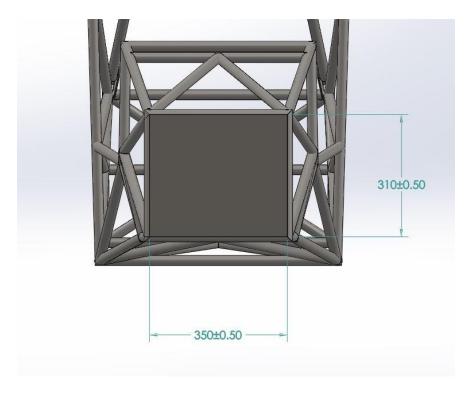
Front view of Chassis with AIP (Note: all dimensions in mm)
